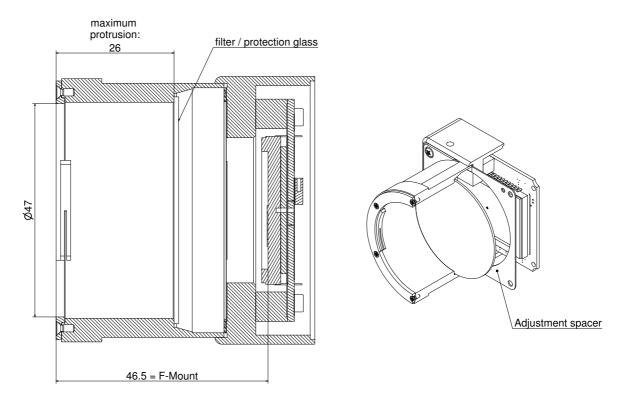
F-Mount cross section (Pike F-1100 and Pike F-1600)
